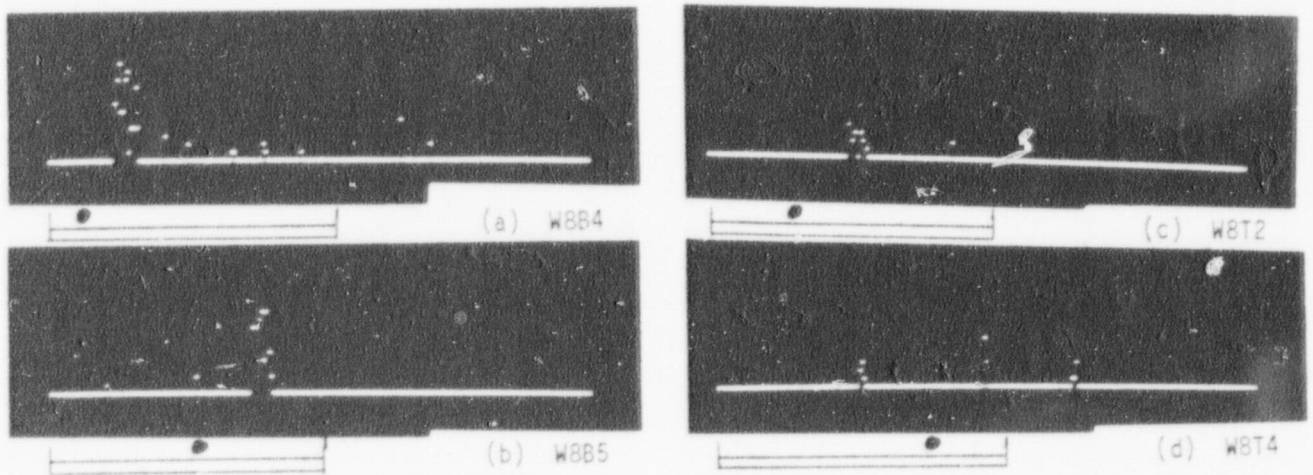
DETECTION OF 2.0" CRACKS DURING SUBMERGED ARC WELDING OF A533B PRESSURE VESSEL STEEL
